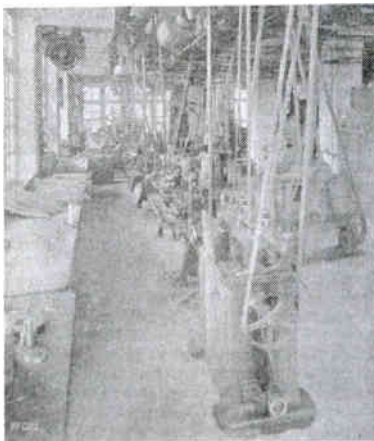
Special Grinders for Sharpening Knives of Slicing Machines. Group Driven From 10 H.P. Motor
